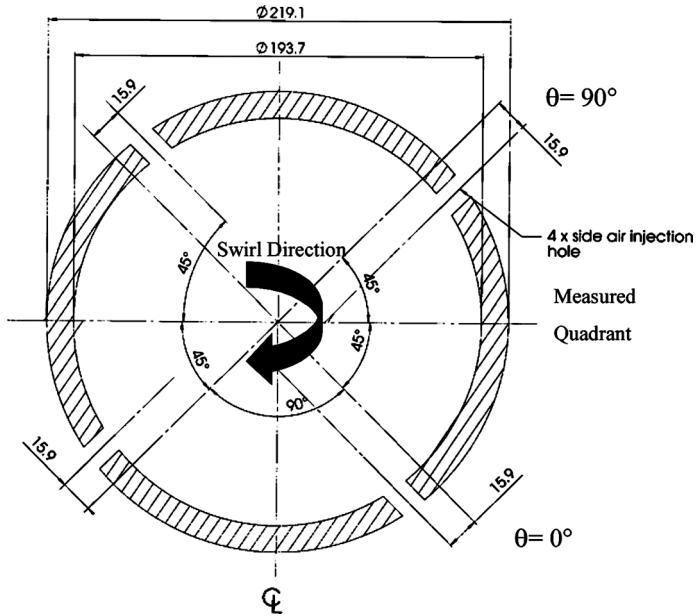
Section view of combustor at $z/D = 0.2$ (all dimensions in mm).
